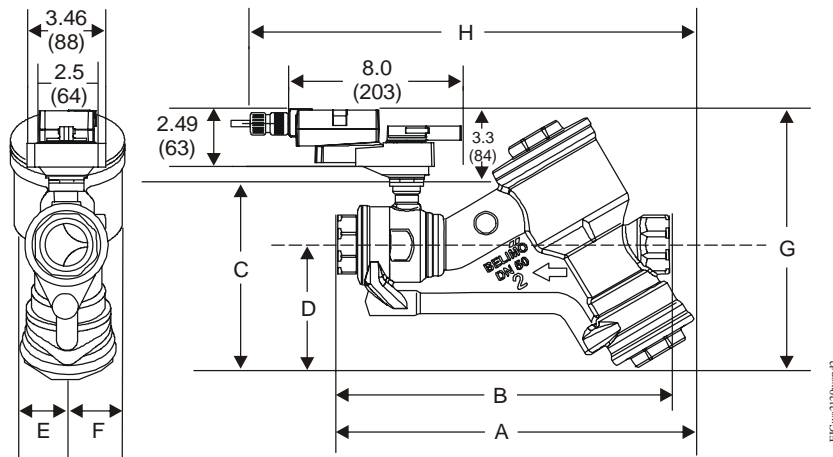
VA2120 Actuated P1000 Pressure Independent Valve without Pressure Taps Dimensions, in. (mm)
